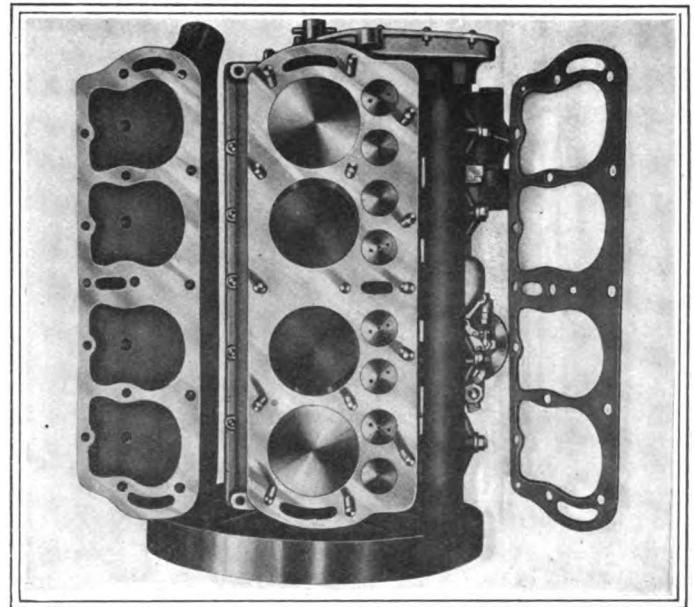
Plan view of the en bloc cylinder casting on the Metz motor
